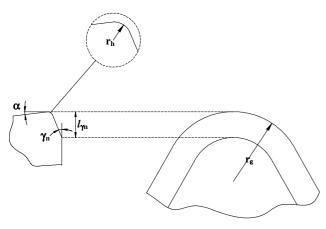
Geometry parameters of PCBN insert used in the tests.
